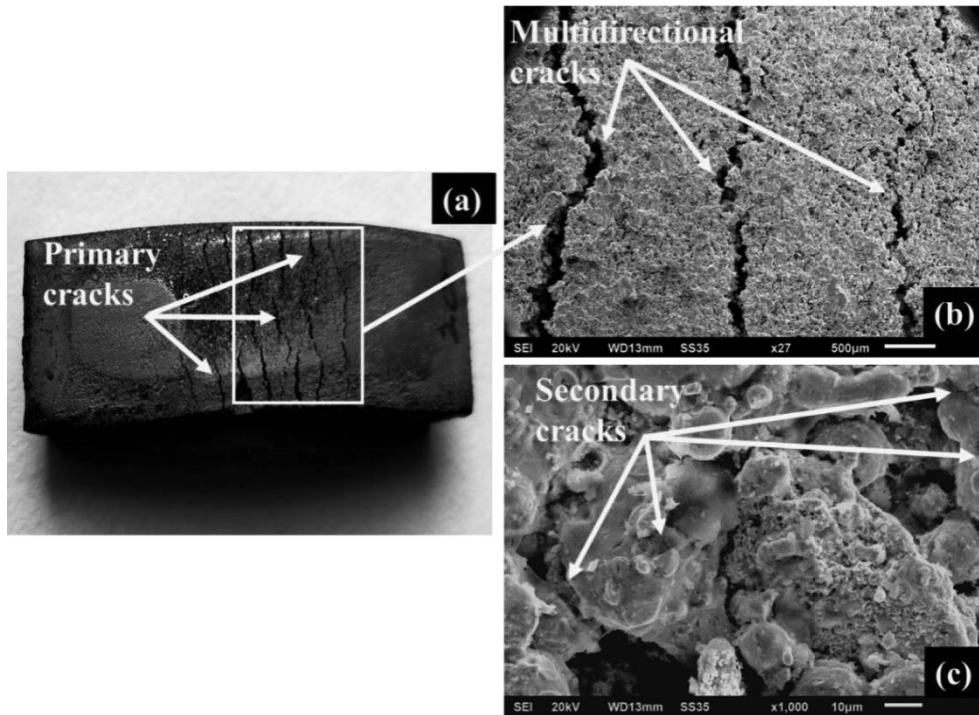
Fractured EWAC-20WC10Co2Ni clad specimen after 3-point bend test
